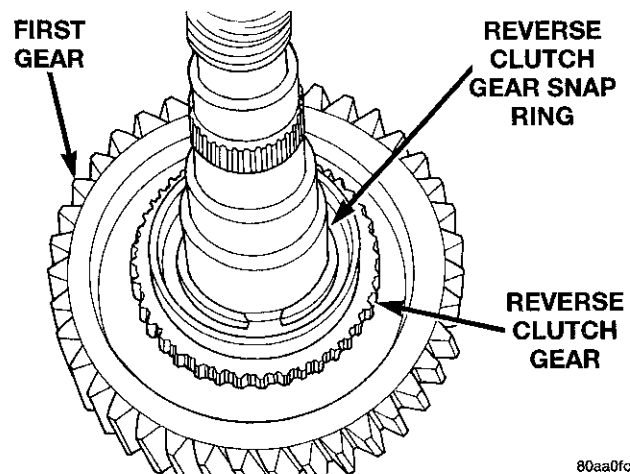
First Gear, Clutch Gear, And Snap Ring Installation
